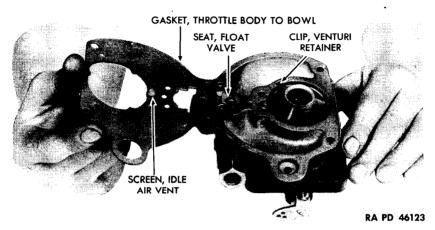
Lifting Off Throttle Body to Bowl Gasket
